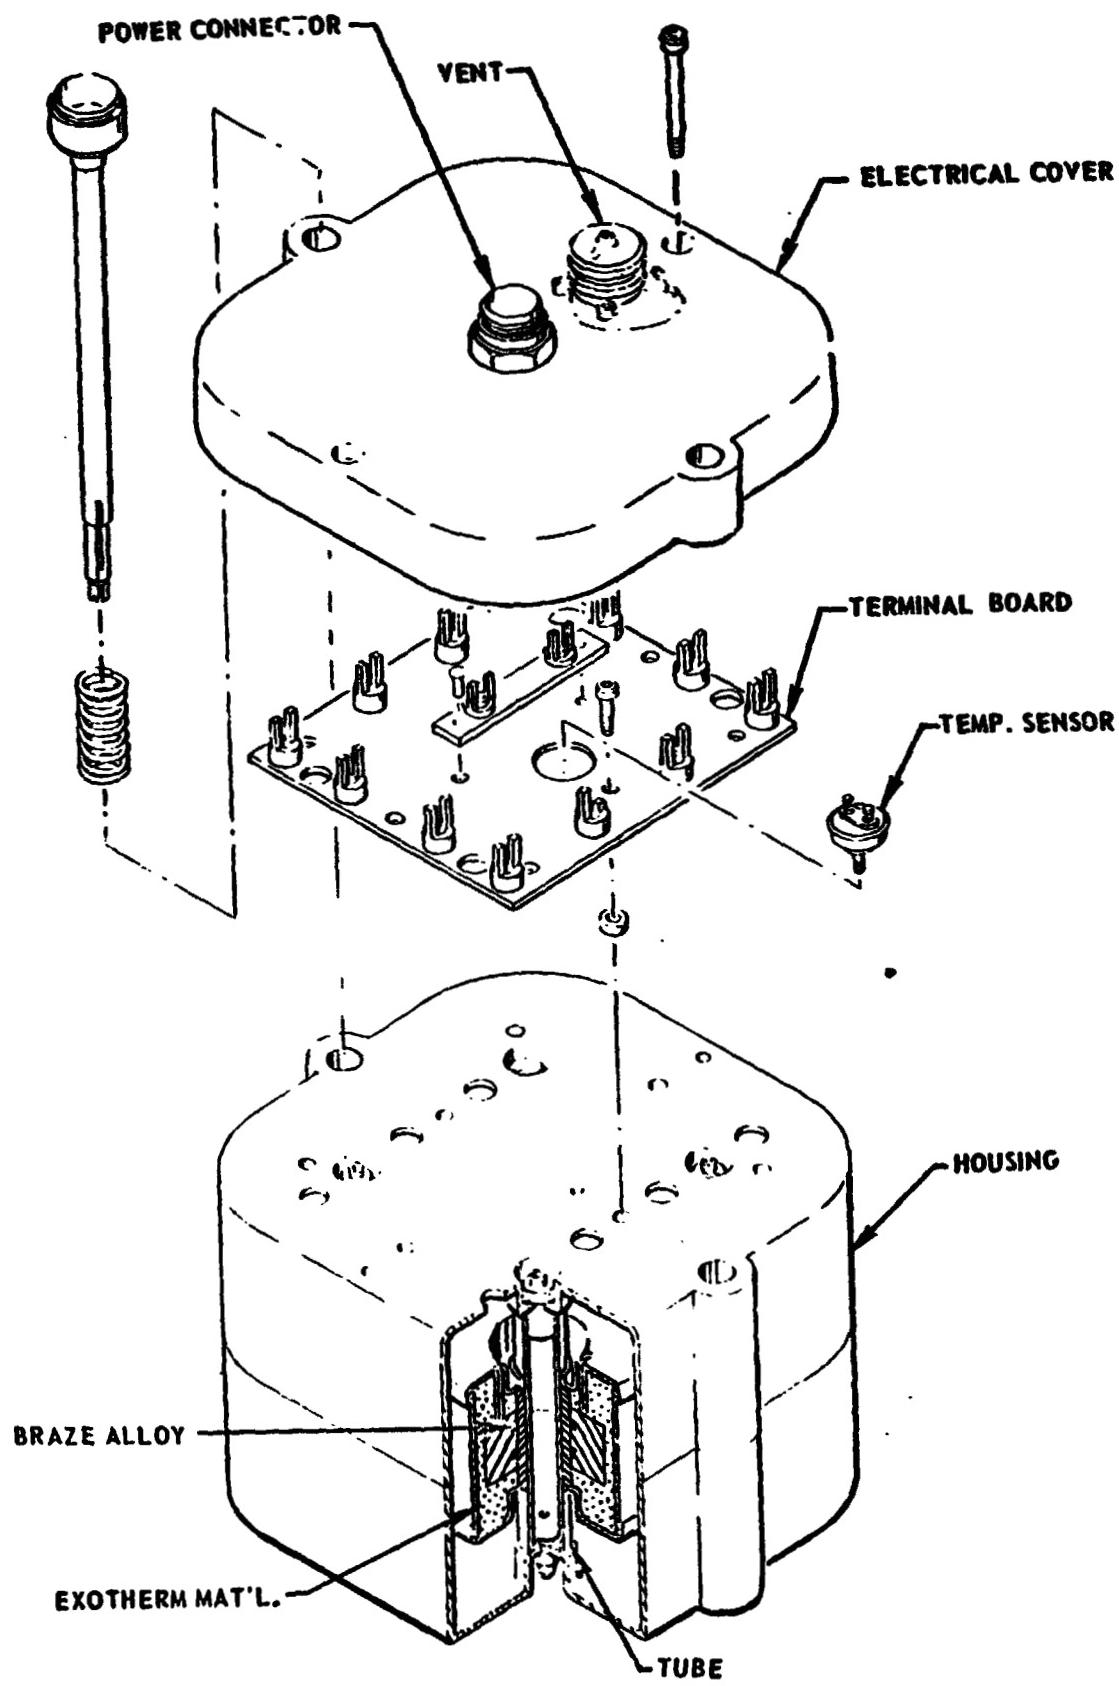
EXOTHERMIC BRAZING PACKAGE
